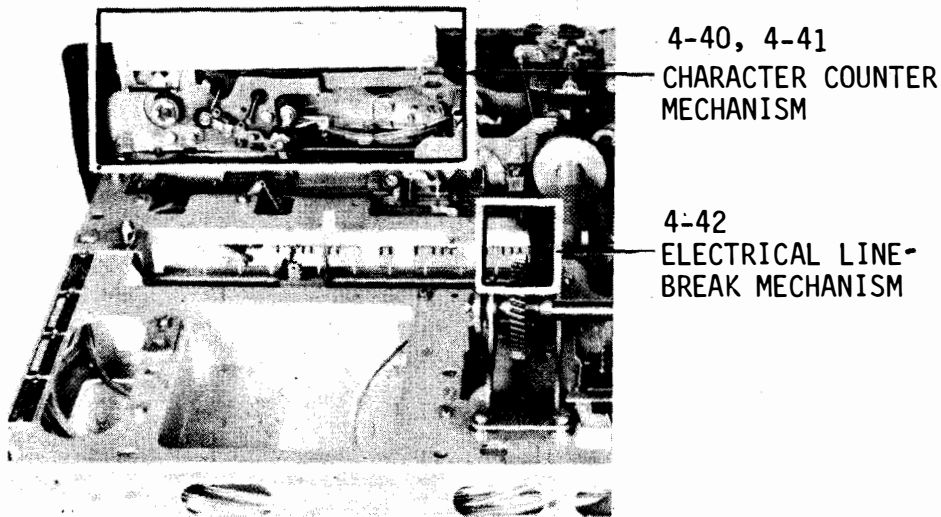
Character Counter and Electrical Line-Break Mechanisms, Rear View
